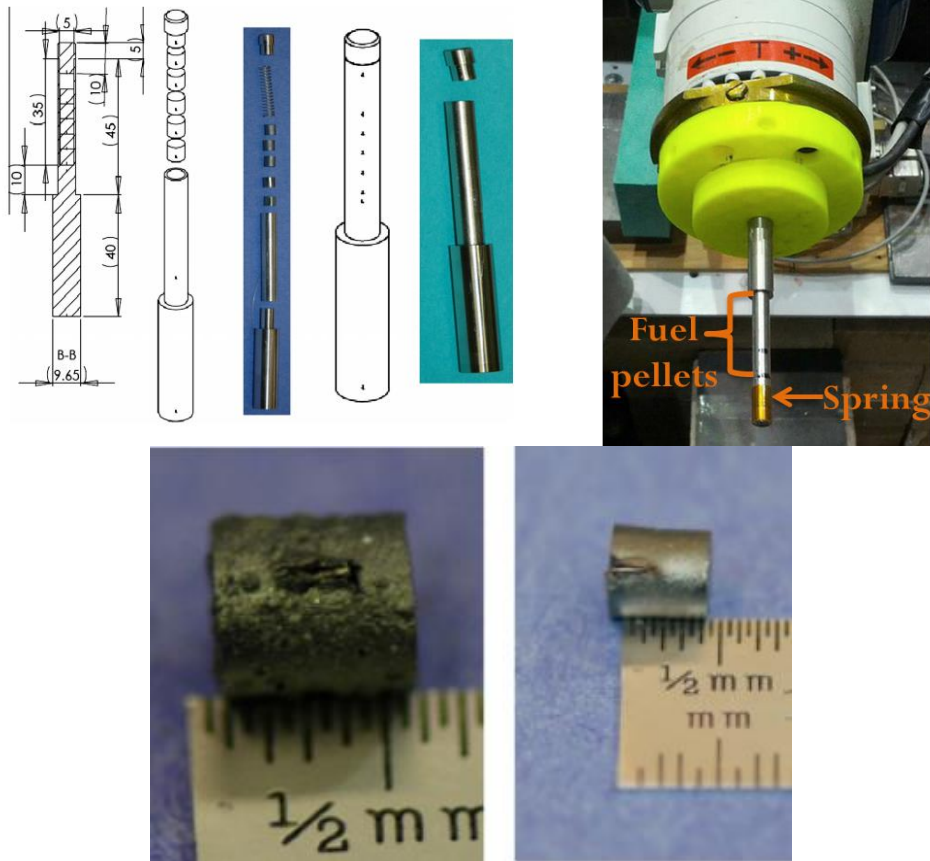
Urania mockup fuel rodlets (top-left), robot holding fuel rod (top-right), and example fuel pellets with intentionally introduced defects (bottom).
